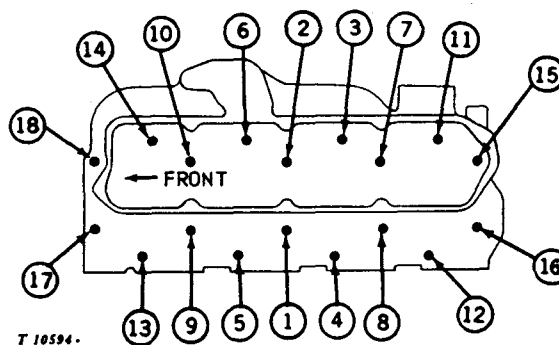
Four Cylinder Cylinder Head Torque Sequence
